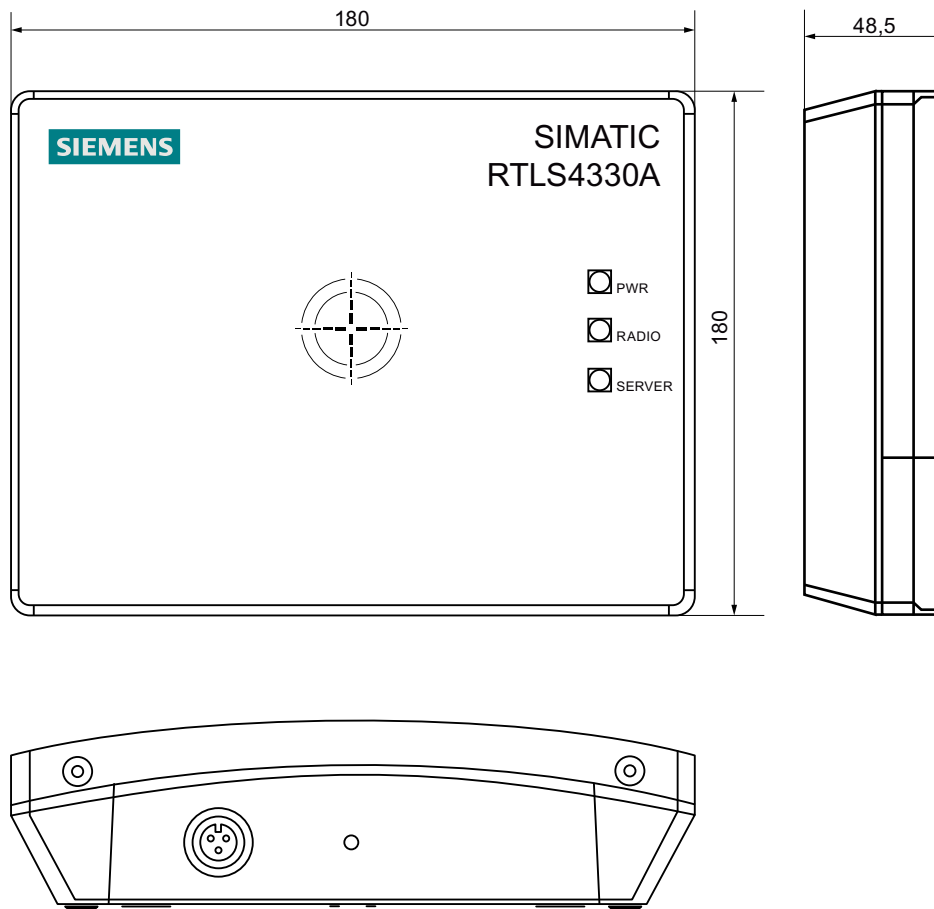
Dimension drawing SIMATIC RTLS4330A - All dimensions specified in millimeters
